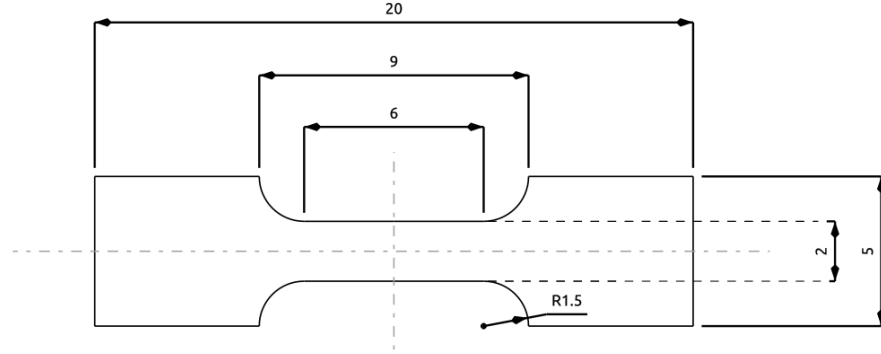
Dogbone tensile specimen of Ni. dimensions in mm.
